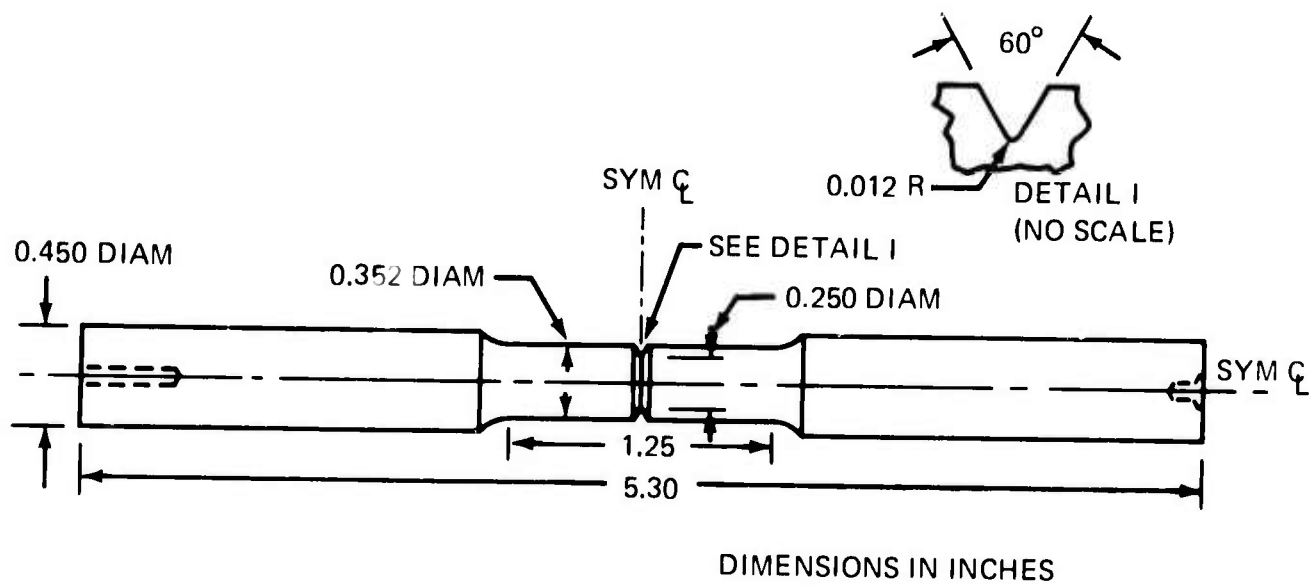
Notched Axial Fatigue Specimen ($K_t = 3.0$)
